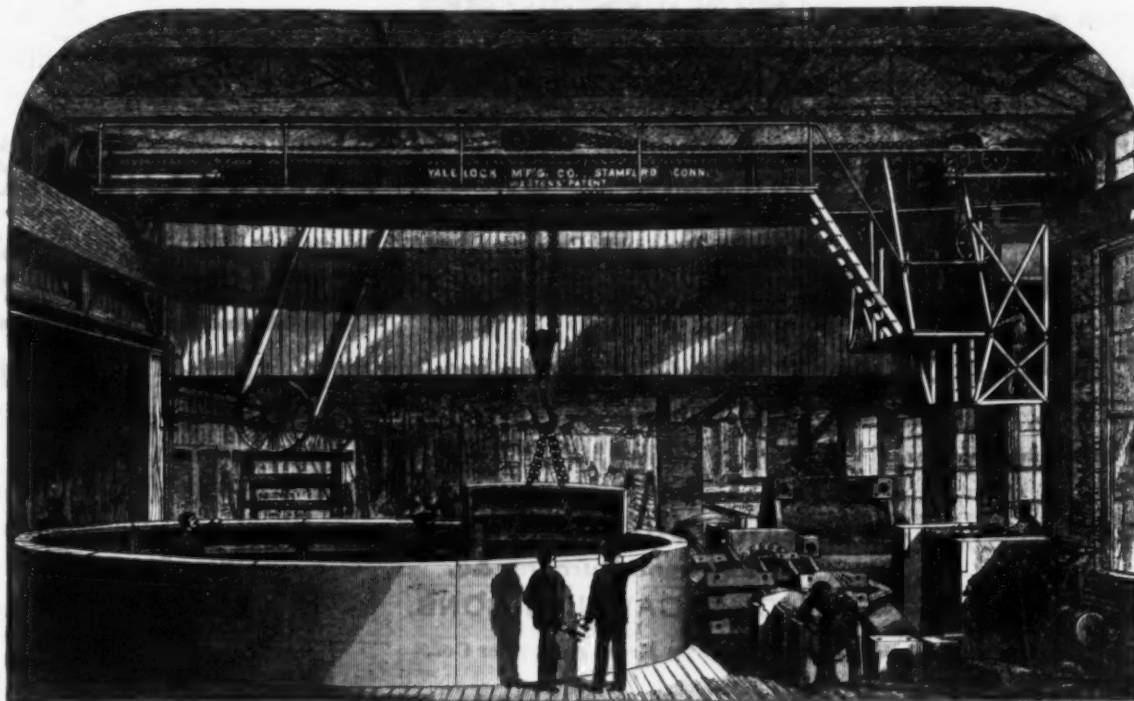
General View of Weston's Patent Power Traveling Crane.
